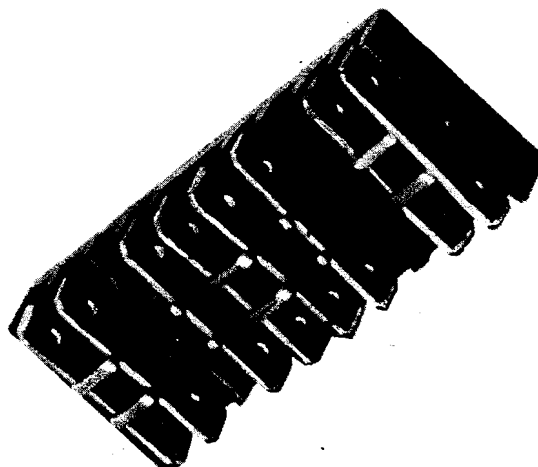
Line connector for headlamp and for the internal electrical equipment
